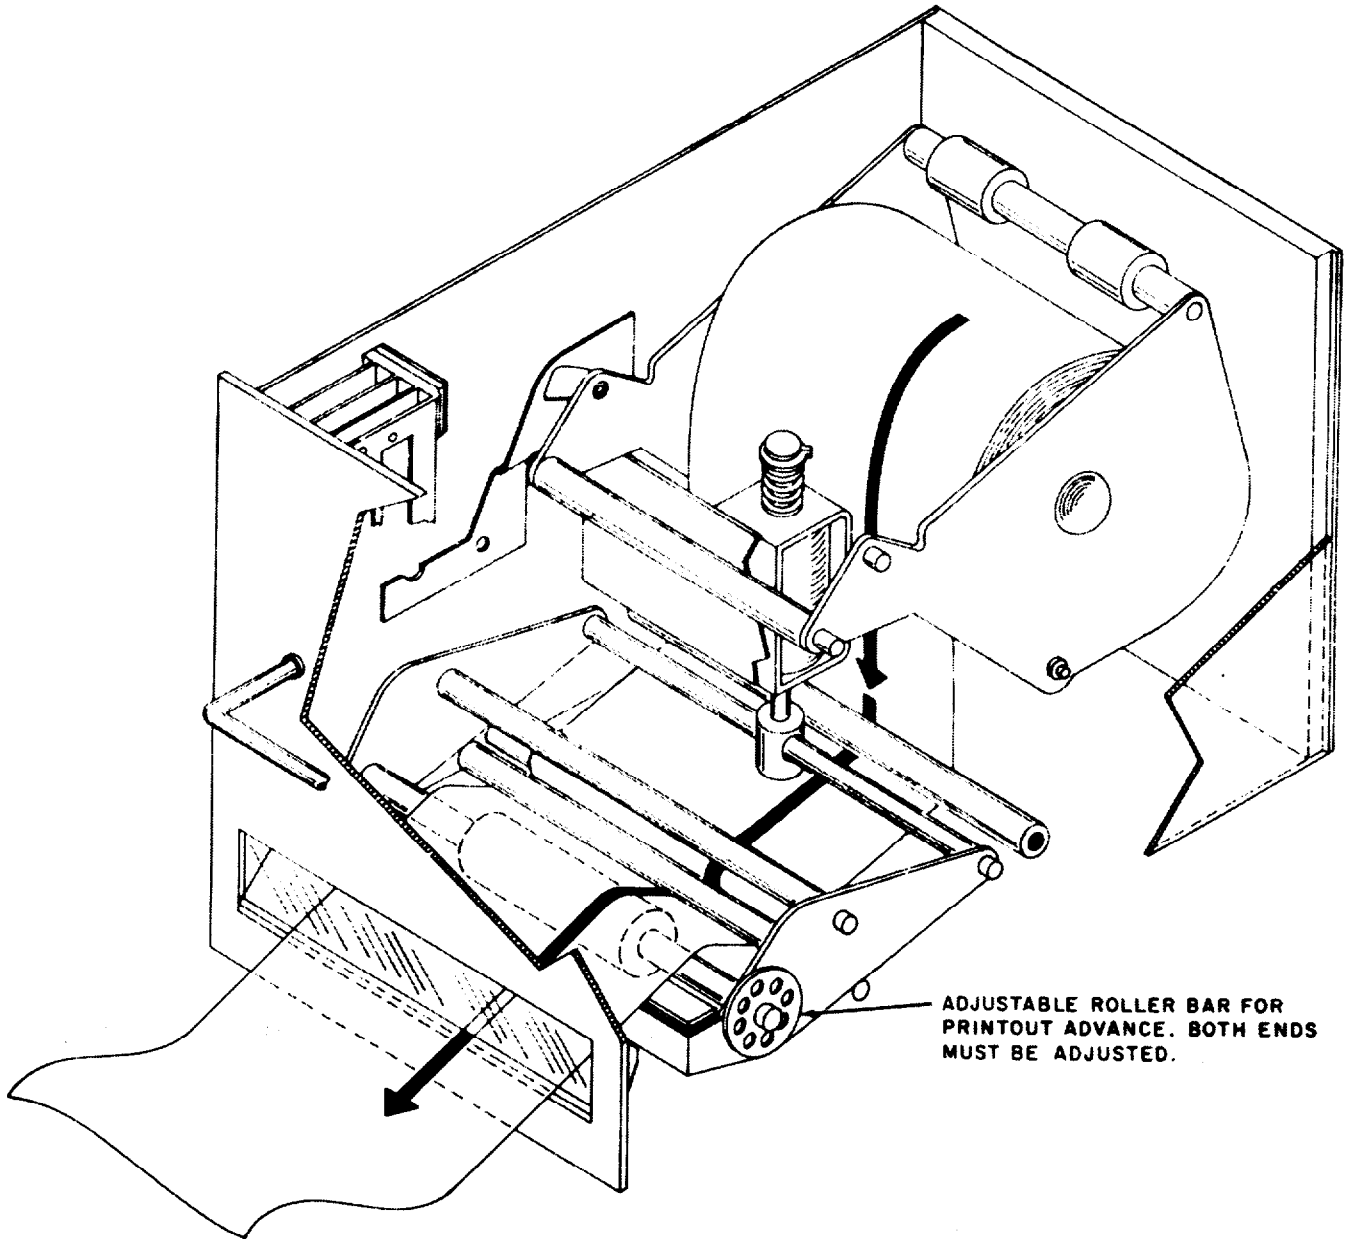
Paper Path—KS-20537, L1 Moduprinter
